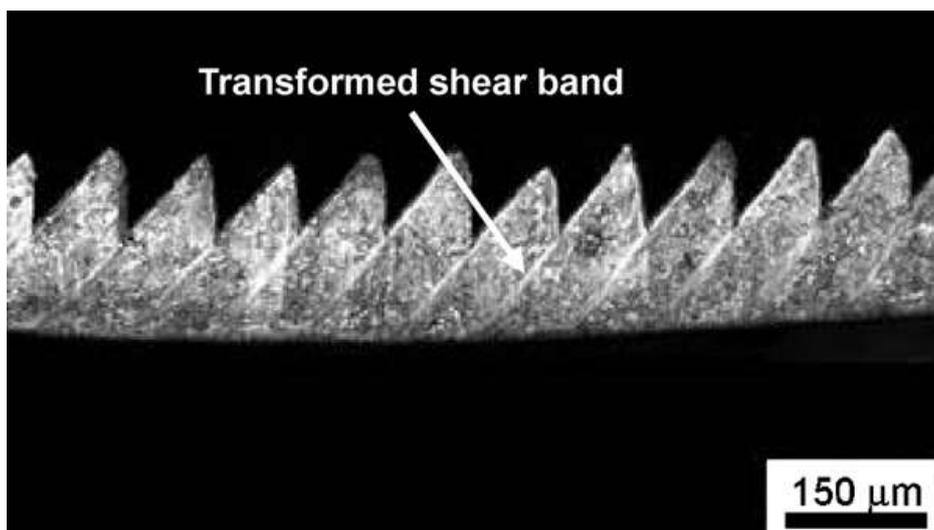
Shear bands causing serrated chips observed in AISI 1045 steel machined at a cutting velocity of 432.6 m/min. After [7].
